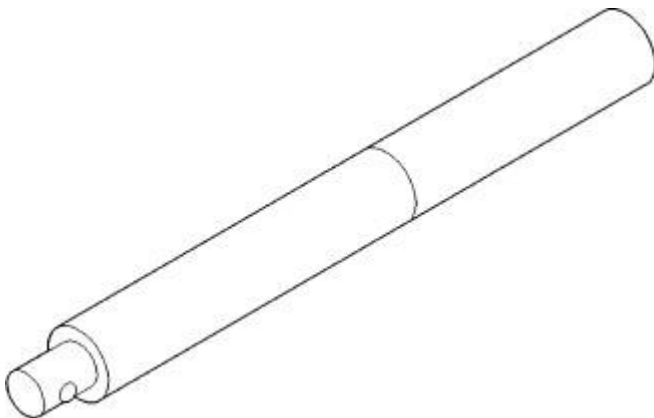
DRIVER HANDLE, UNIVERSAL - C-4171
